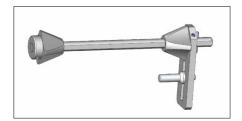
KOMBITRAK 800 B (Part No. 87000305) with RAPID 480 SL Spool and coil winder with adjustable brake
